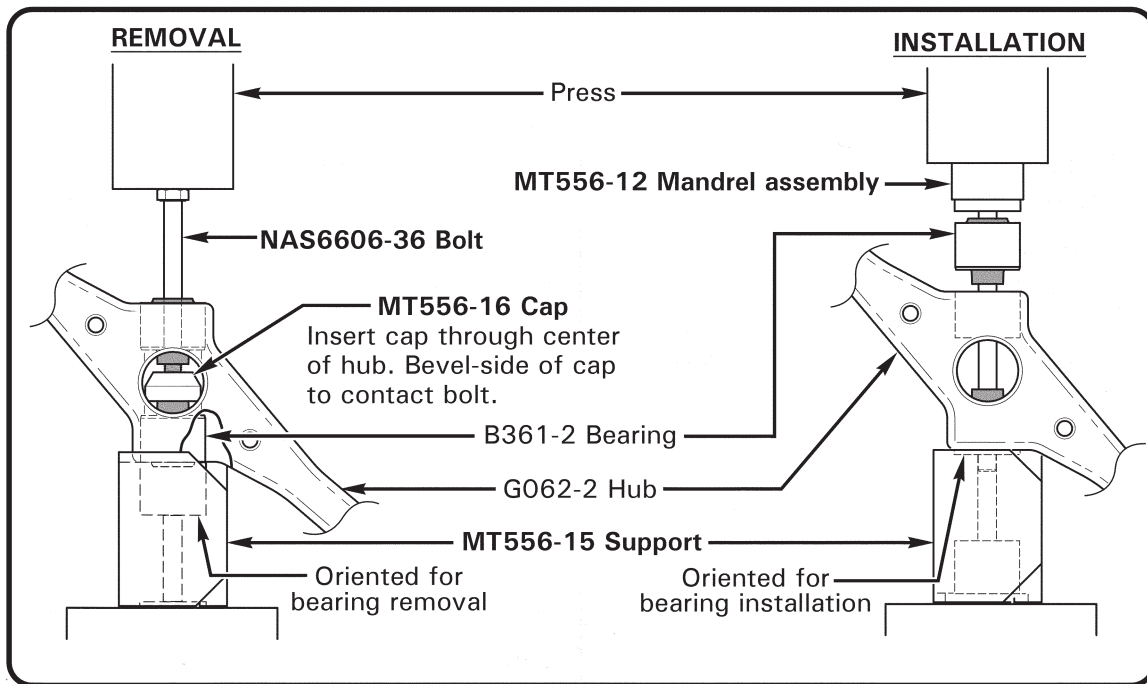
(EARLIER) MT556-11 (R44 & R66) TAIL ROTOR HUB BEARING REPLACEMENT TOOL KIT
